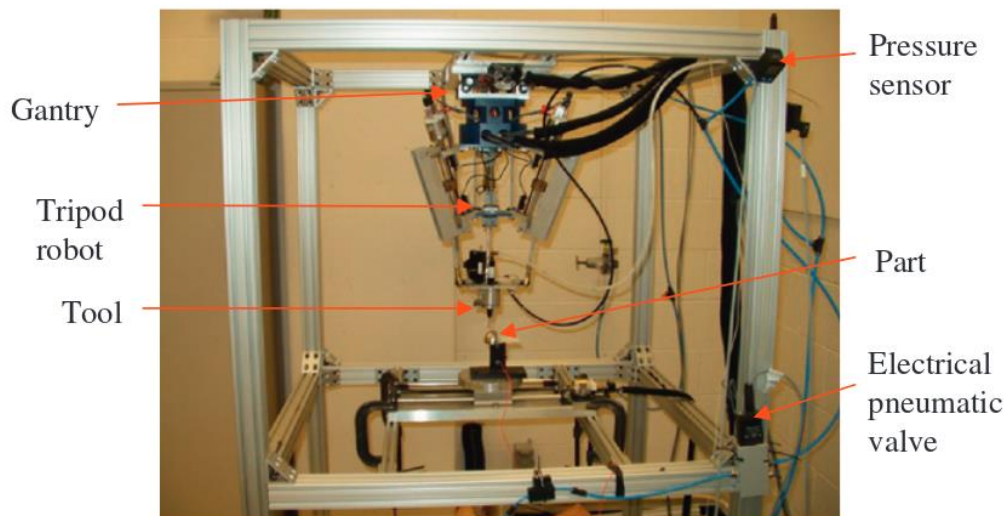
Ryerson University pneumatic parallel deburring robot [29].
